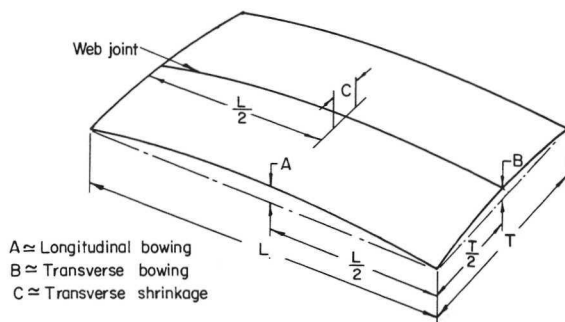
Weldment distortion caused by fusion welding.
